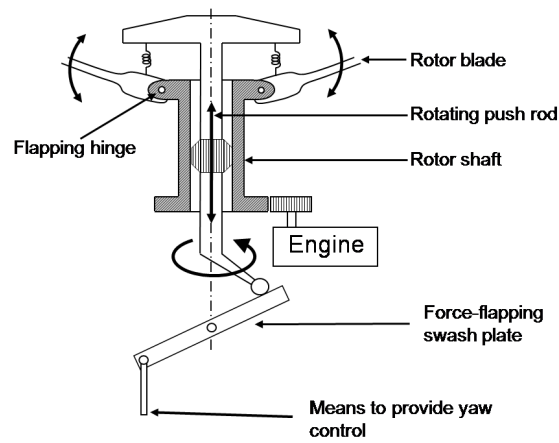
Principle of a forced flap mechanism using a push-pull rod and swashplate [33]
